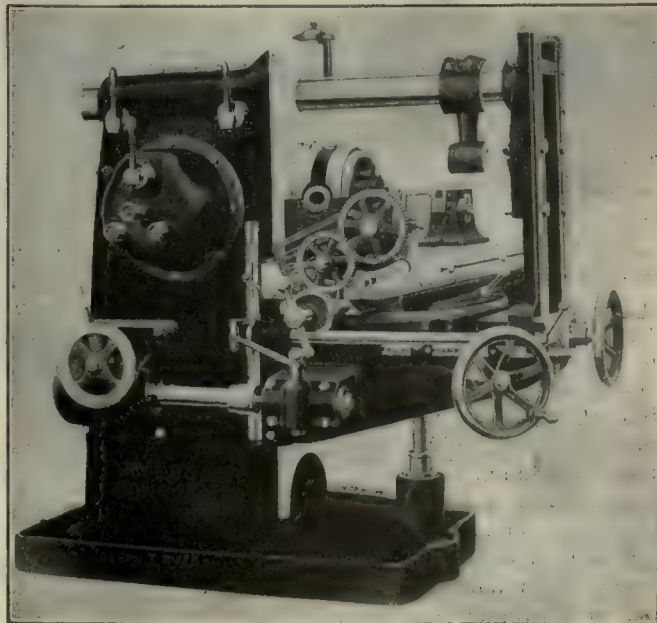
GEAR-CHANGE SIDE OF NO. 3 UNIVERSAL MILLING MACHINE
